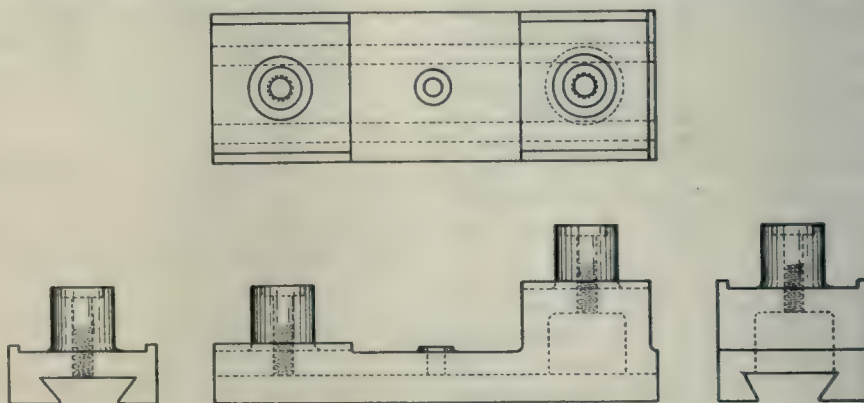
CROSS SLIDE TO CARRY TURRET HEADS.
